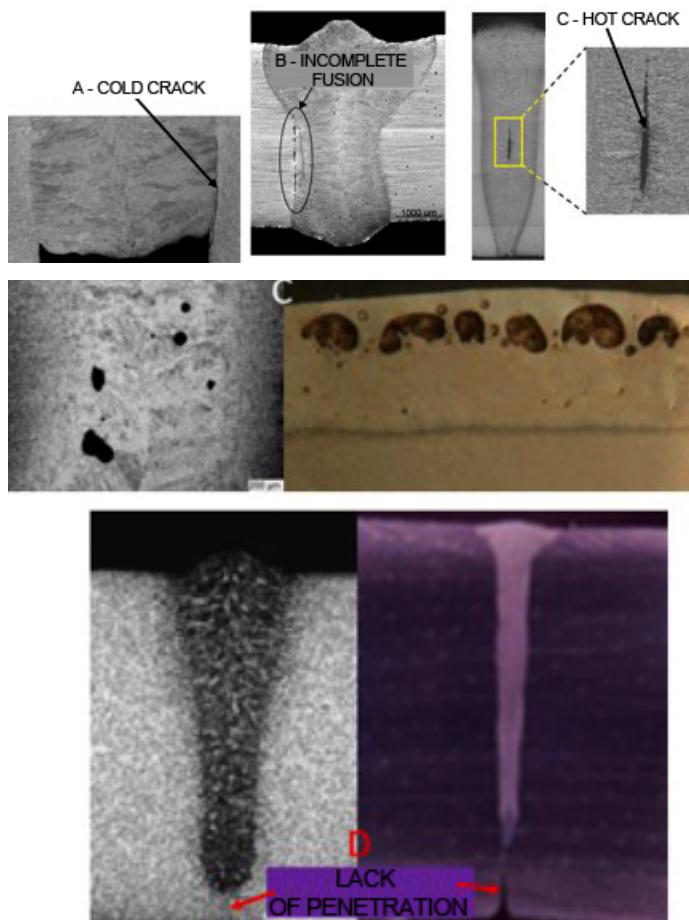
Typical internal imperfections in laser welded joints: A) cold crack, B) incomplete fusion – lack of fusion with the wall of the joints with square preparation, C) hot crack, D) gas pores in the melted area of the weld and under the weld face, E) lack of penetration [1, 5, 19]
